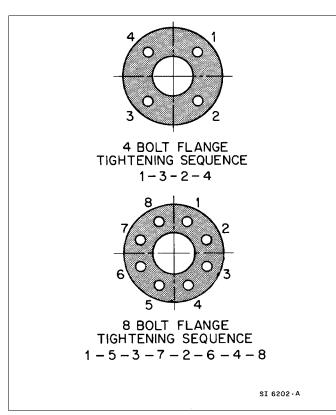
RECOMMENDED FLANGE BOLT TIGHTENING SEQUENCE
